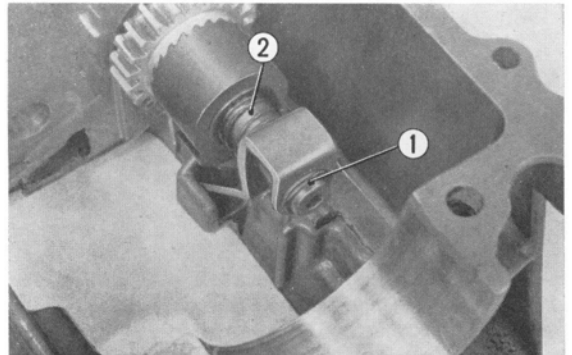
① 12 mm snap ring ② Kick starter shaft
